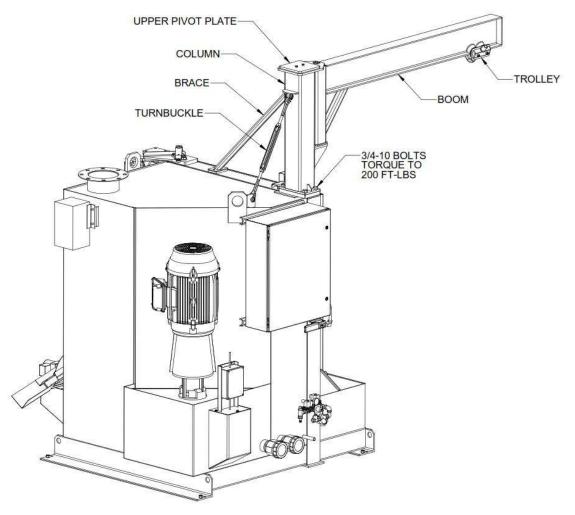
31: Washer Jib Crane, Door Frame Mount
